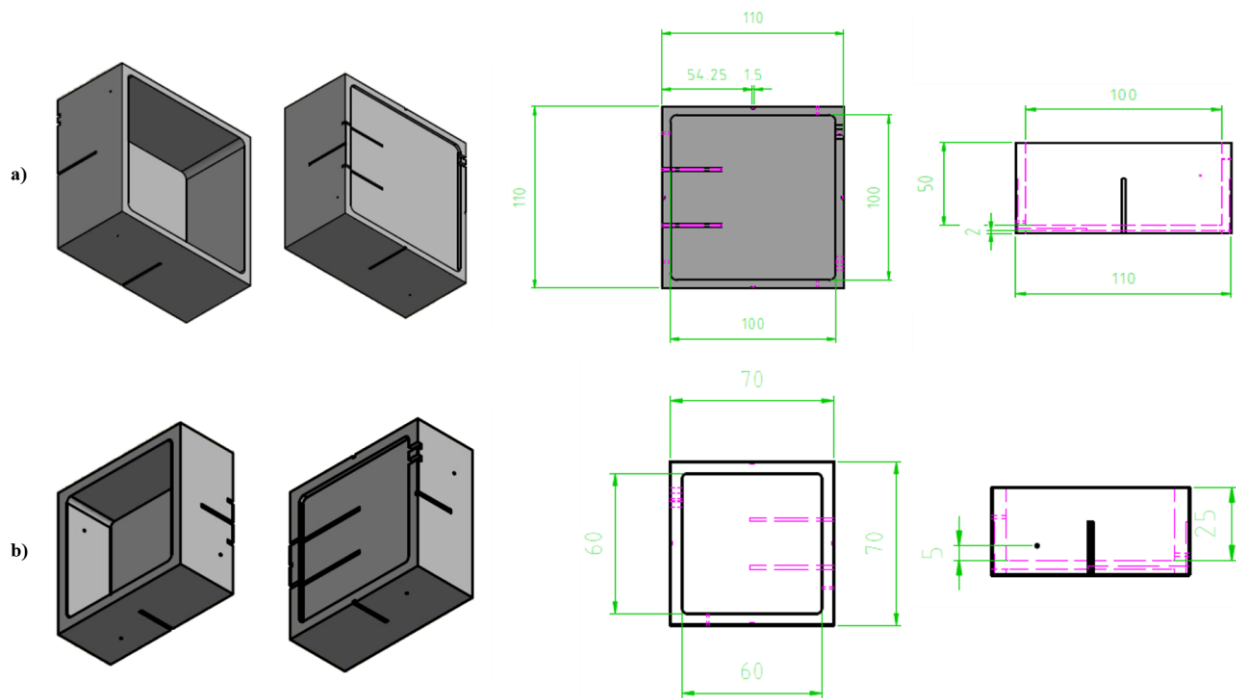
Three dimensional views, with labeled dimensions (mm), of (a) larger heat sink, and (b) smaller heat sink.
